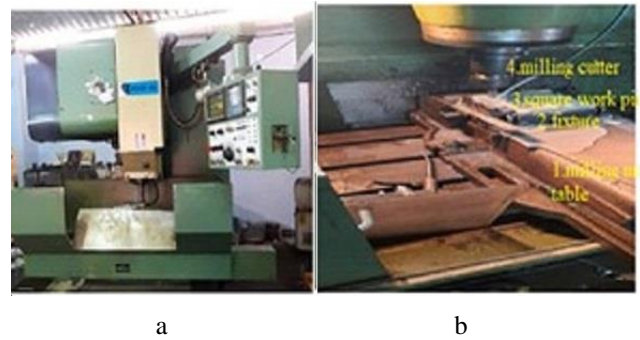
a) CNC milling machine; b) aluminium plate held in vice
